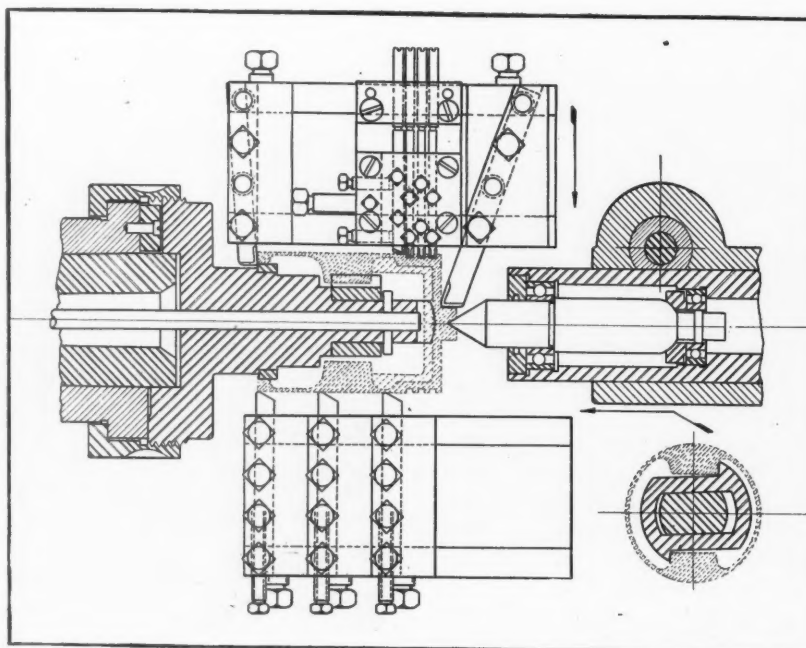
Finish-turning, grooving and facing the Piston with Tooling Similar to that shown in Fig. 13
